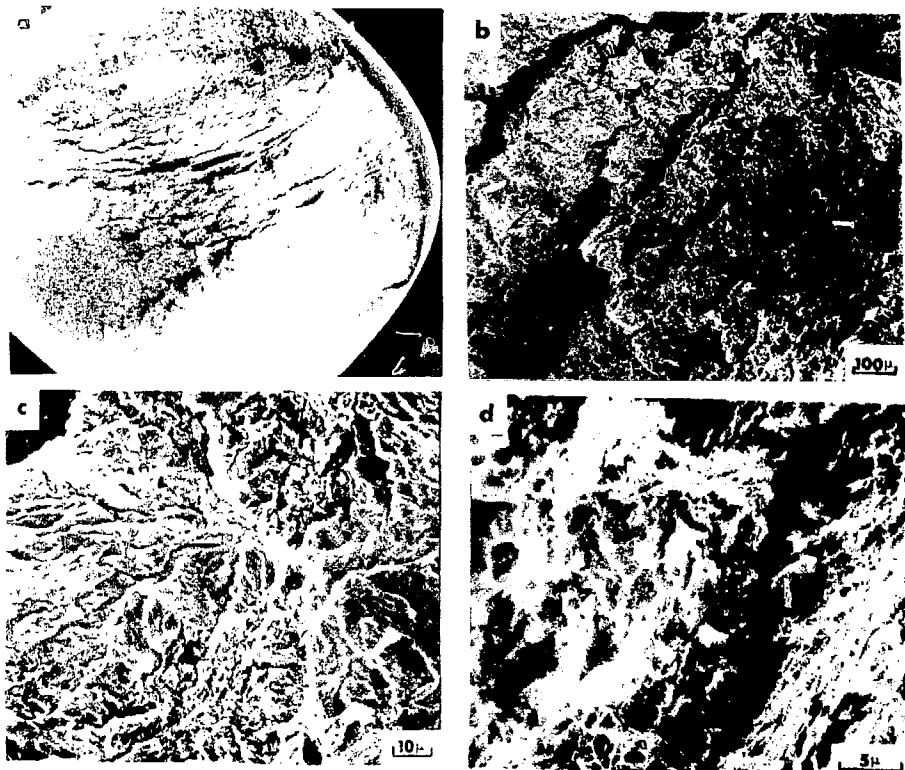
Fractography of 21-6-9/21-6-9 GTA welds thermally charged and tested in 69 MPa hydrogen. Center of specimen shown in (b) and (d), edge (c).
